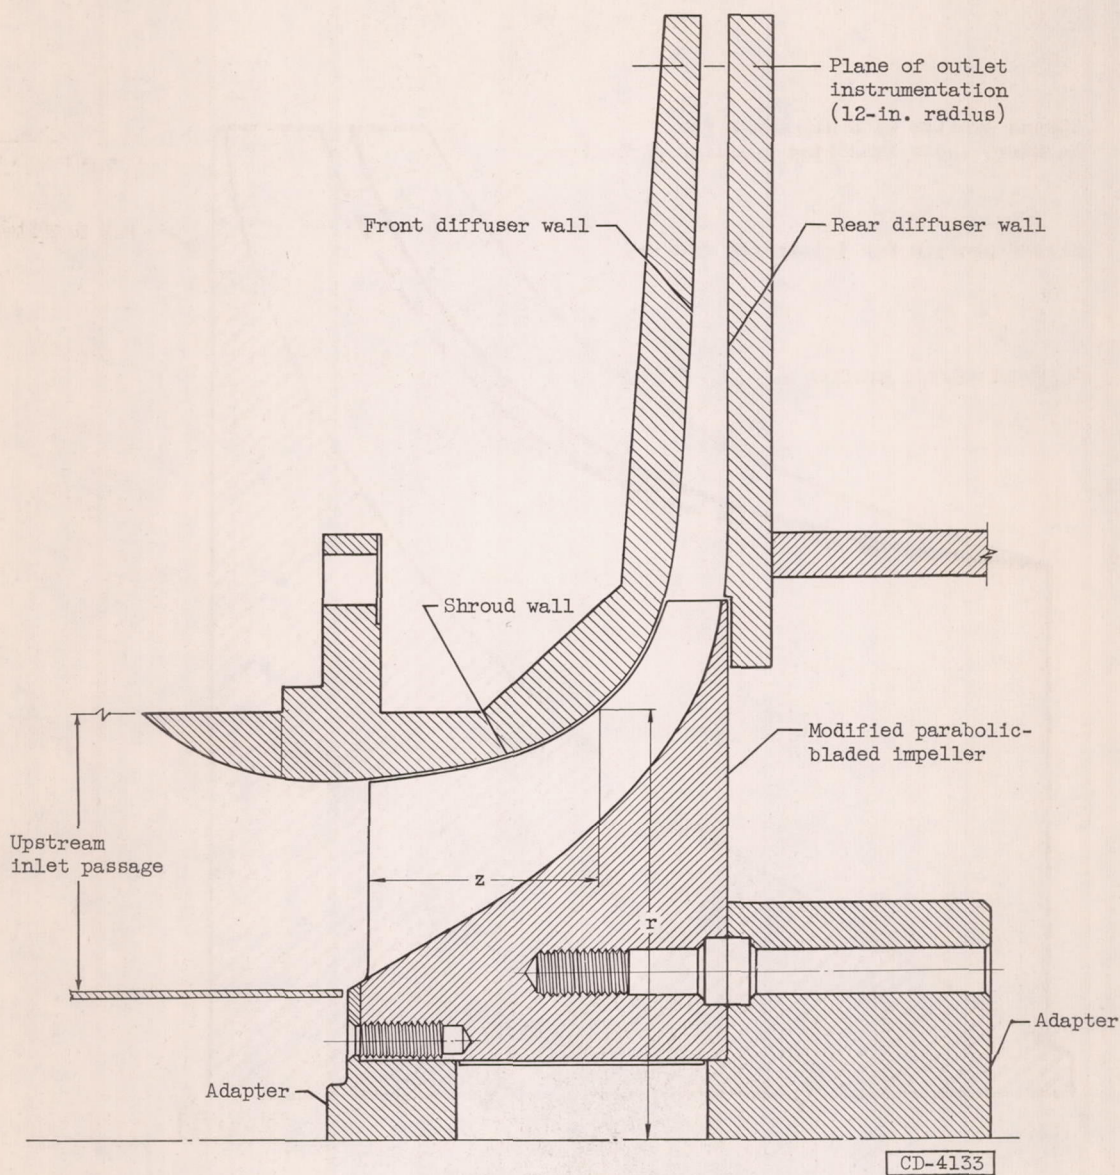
Cross-sectional view of modified parabolic-bladed impeller and diffuser showing location of outlet instrumentation.
